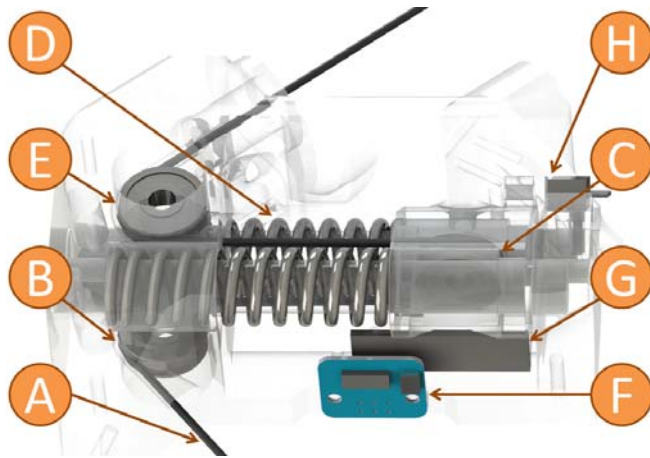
Depicted above is our series compliance mechanism. The cable (A) enters from the motor spool and wraps around fixed pulley (B) then continues to moving pulley (C) which is attached to compression springs (D). The cable continues over fixed pulley (E) and exits toward the omnidirectional routing mechanism. Magnetic encoder sensor (F) and magnetic strip (G) provide spring displacement measures with limit switch (H) giving an absolute reference.
